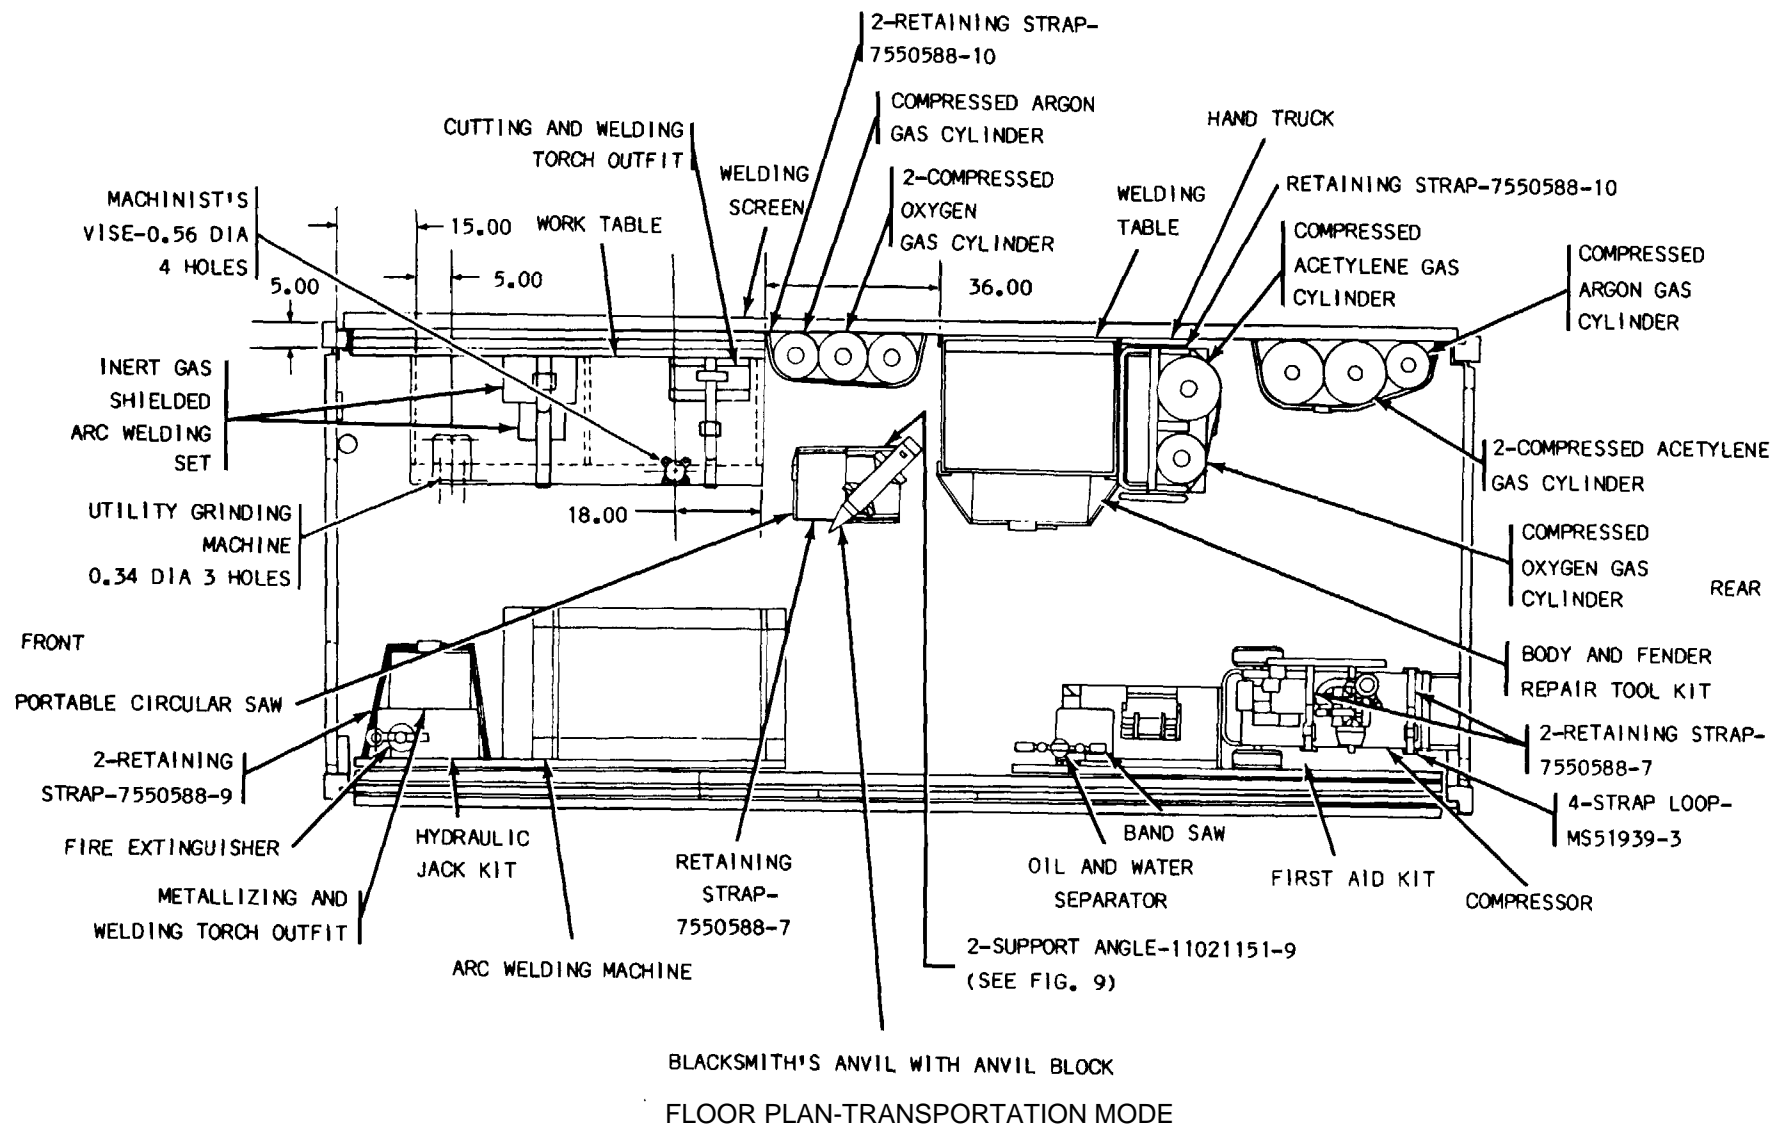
Components to be mounted, unit 2, ISO-2-1, floor plan.
